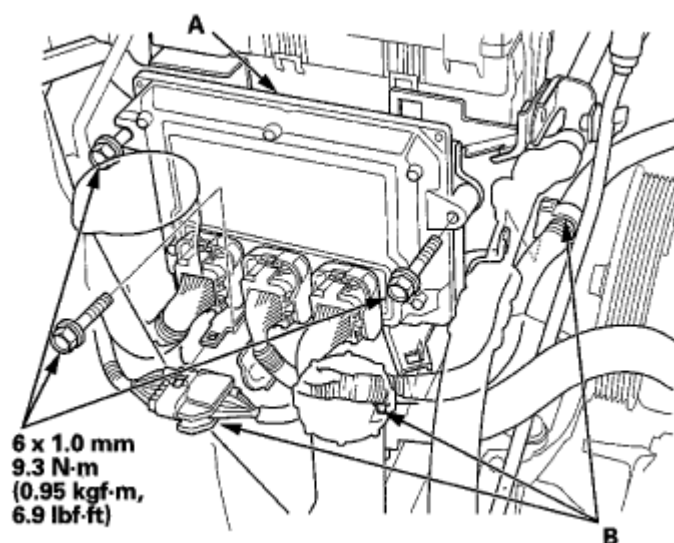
Identifying PCM And Harness Clamp With Torque Specifications (Keihin PCM)
